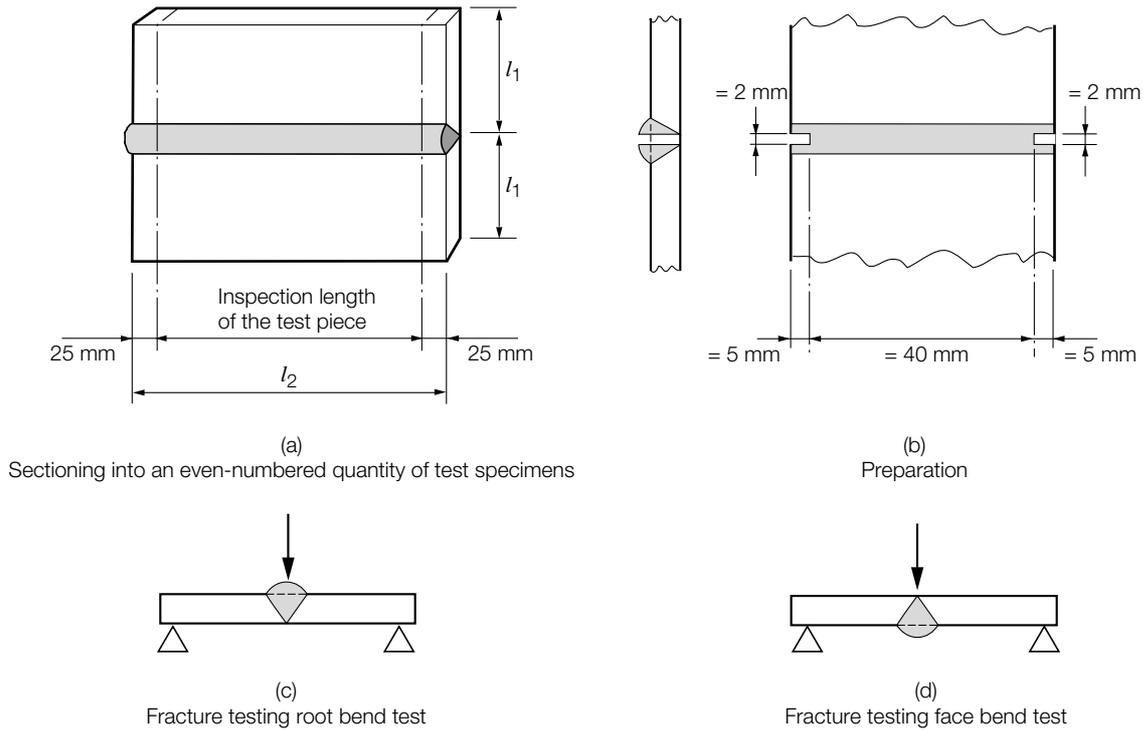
(b) Preparation and fracture testing of test specimens for a butt weld in plate
